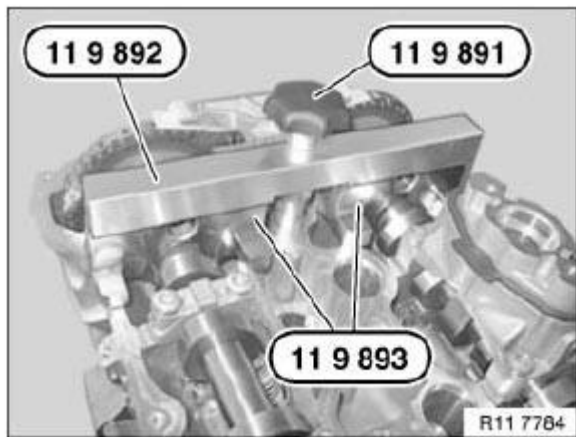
Identifying Special Tool (11 9 892, 11 9 893 And 11 9 891)
